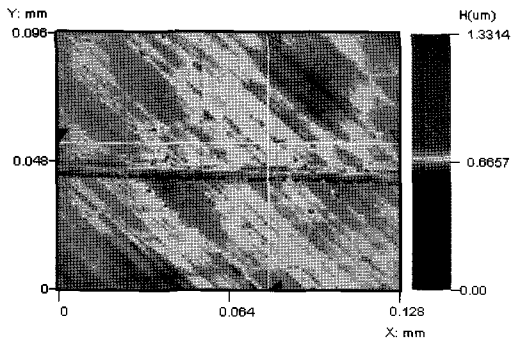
Picture of a test specimen: bare wafer with tool marks.
